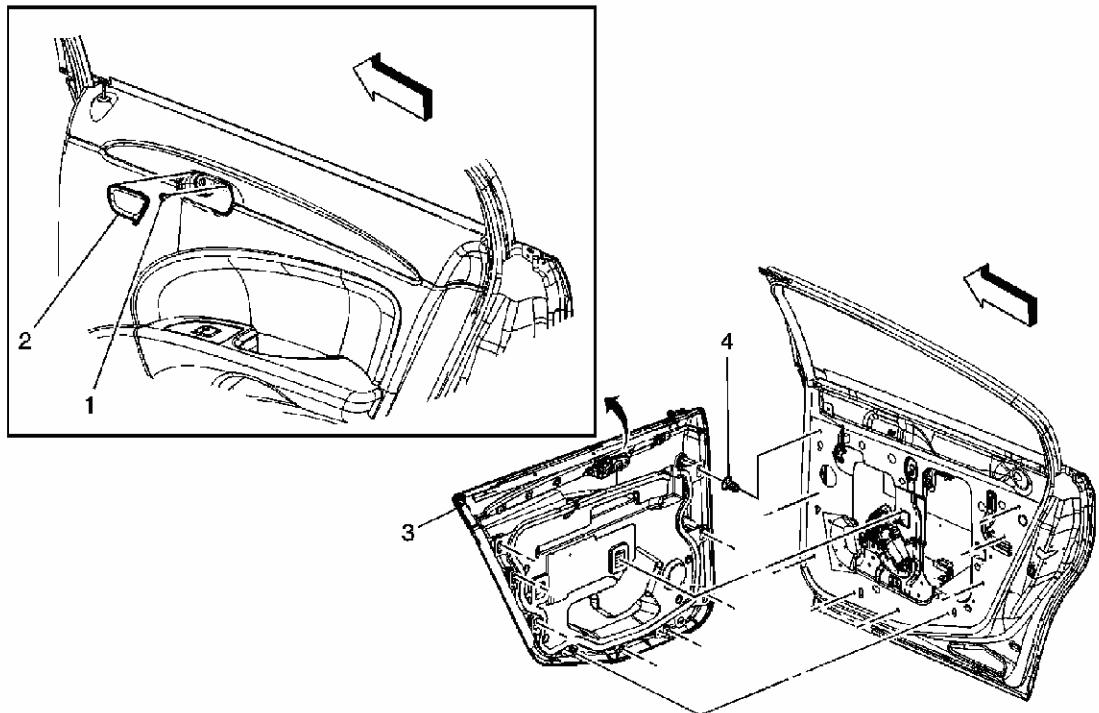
Removing/Installing Rear Side Door Trim Panel
